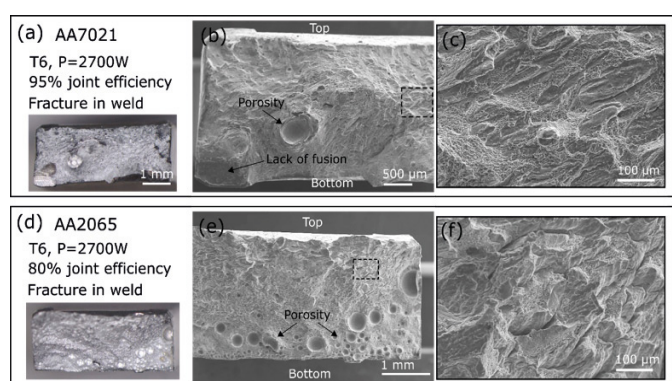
Fracture surface characteristics for the T6 post-welding heat treated specimens for welds produced with laser power of 2700 W. (a) AA7021 fracture surface. (b) AA2065 fracture surface.
